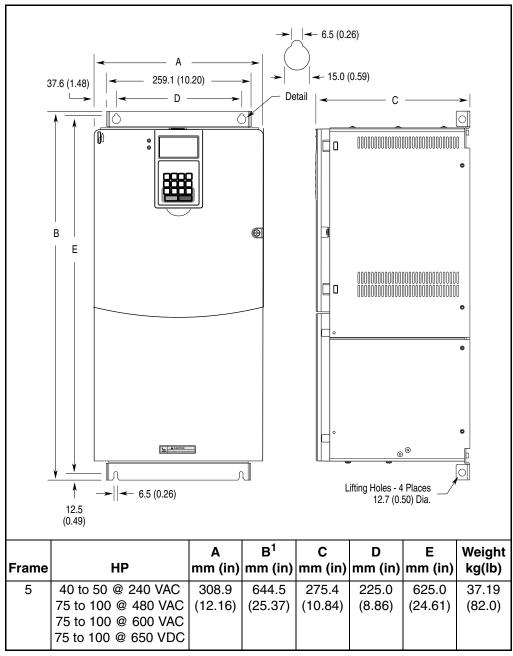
GV6000 Drive Dimensions Frame 5
